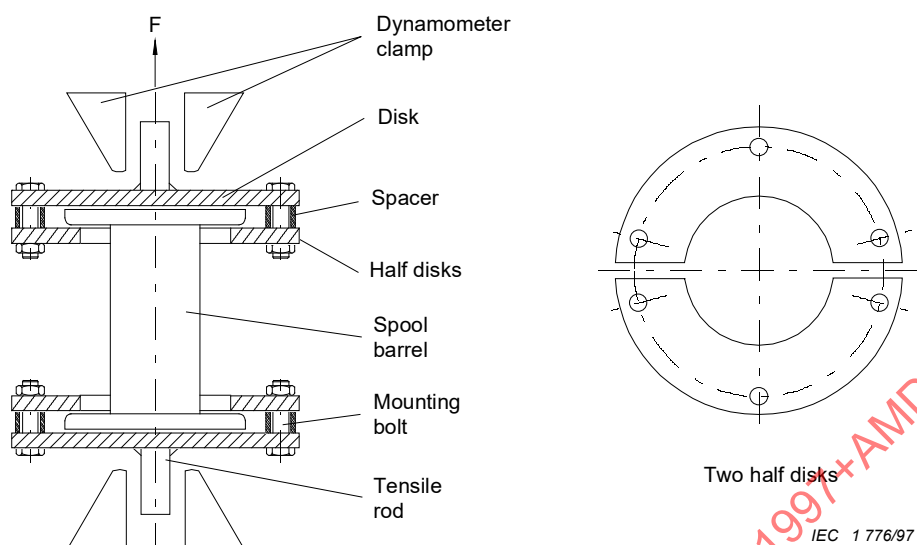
Tensile testing jig for flexibility test (flat flanges)
